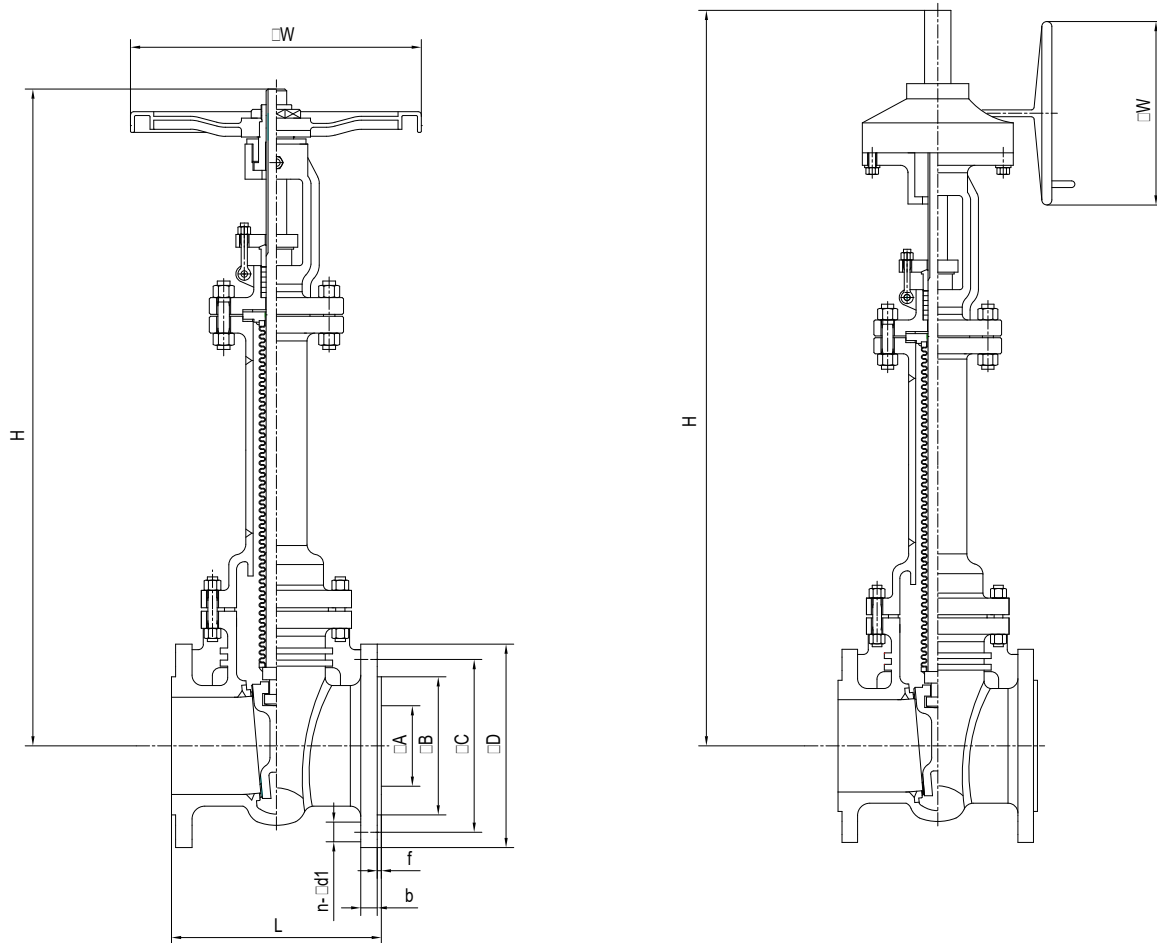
Sectional drawings of ECOLINE GTB 150-600
